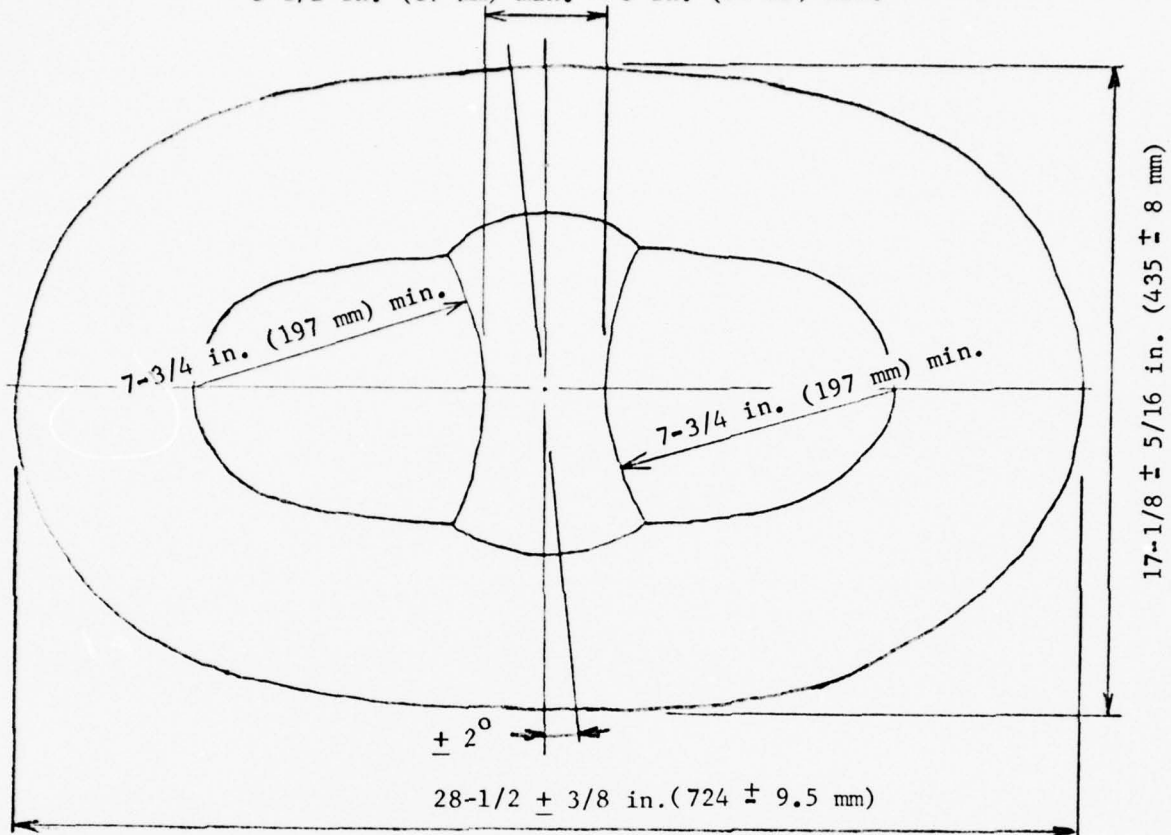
BASIC LINK AND STUD WELDMENT DIMENSIONS
